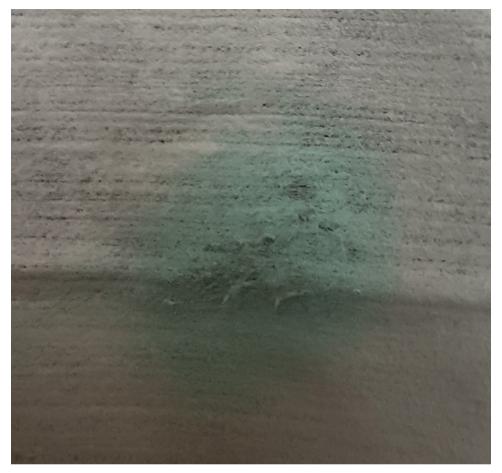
Greenish color deposited on a solder mask check wipe indicating a solder mask curing problem.
